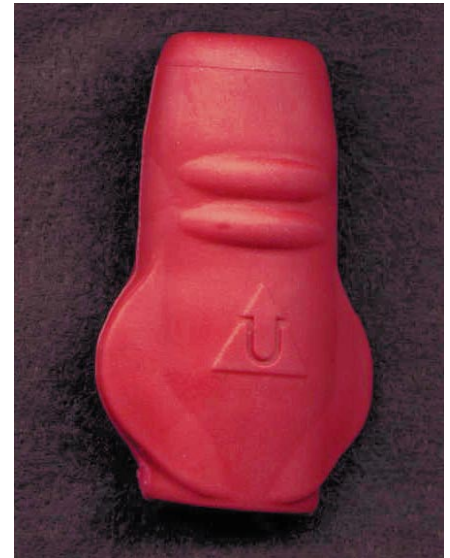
The resulting silicone mouthpiece, created using the mould in Figure 6.
